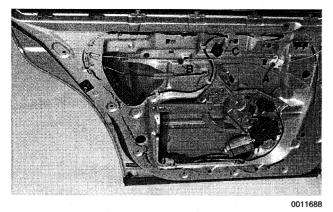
Rear door lock button linkage rod retainer (A), rod retaining clip (B), and harness connector (C).
